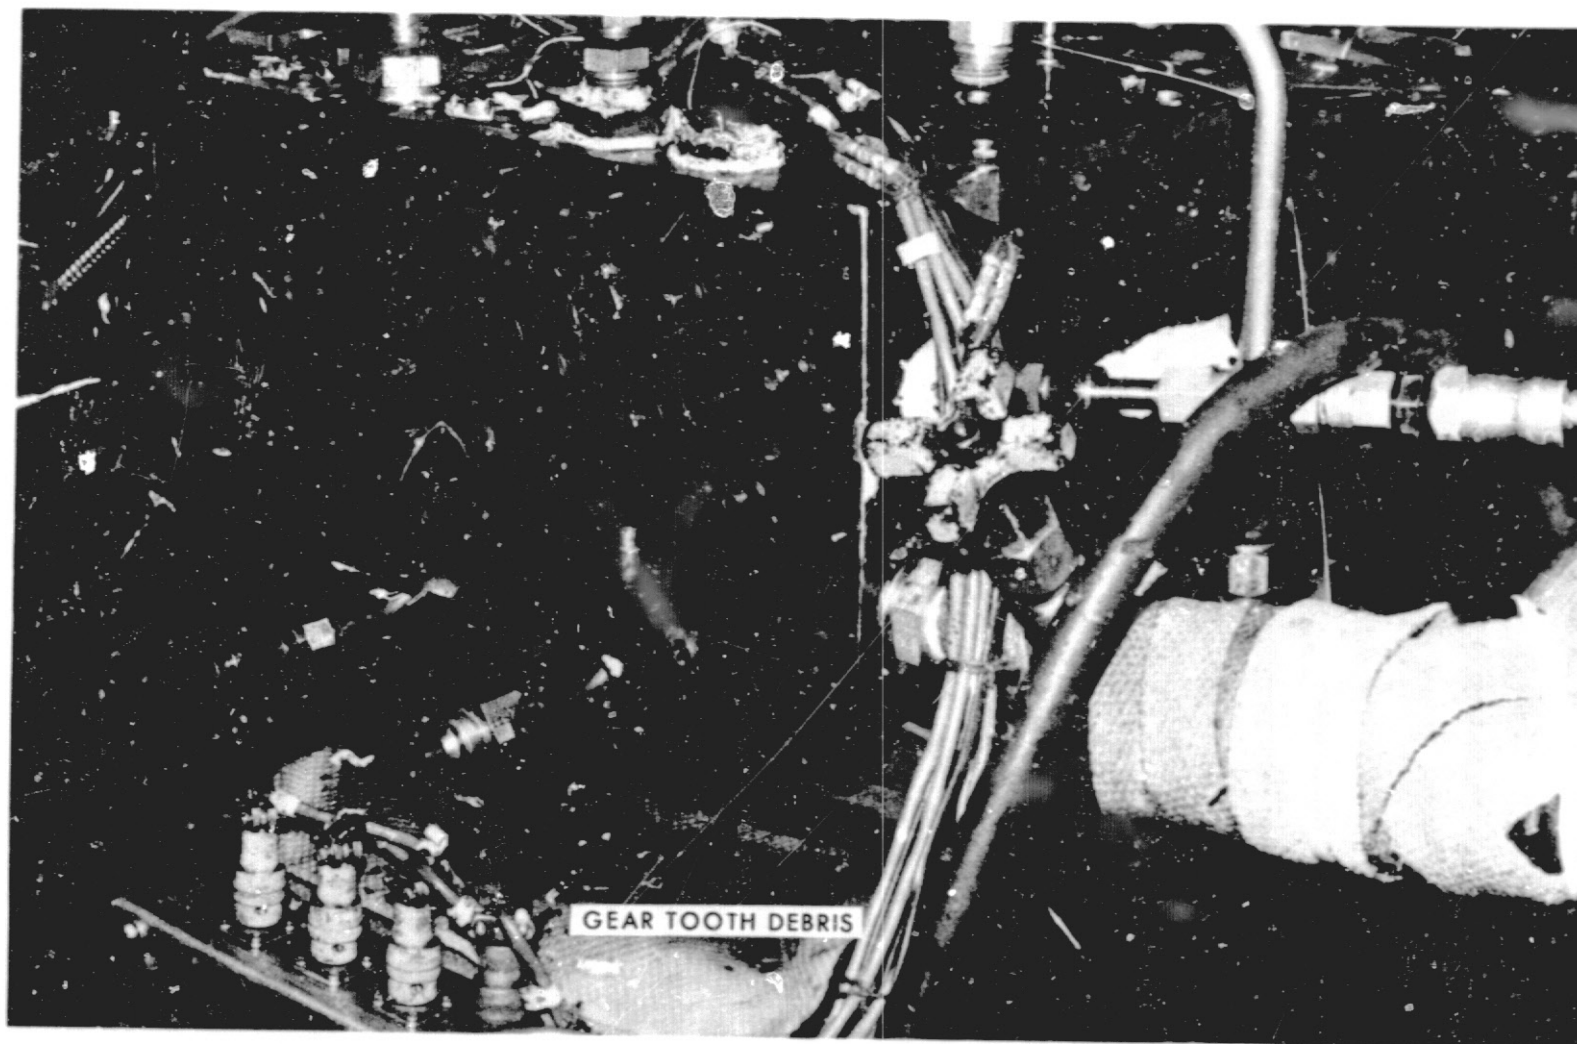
TEST, GEARBOX GEAR ASSEMBLY - STEP SPEED TESTING AT 20,000 RPM
